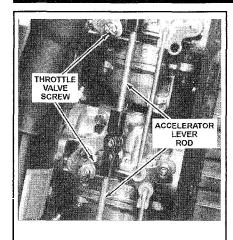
Accelerator lever rod location adjacent to the throttle screws
